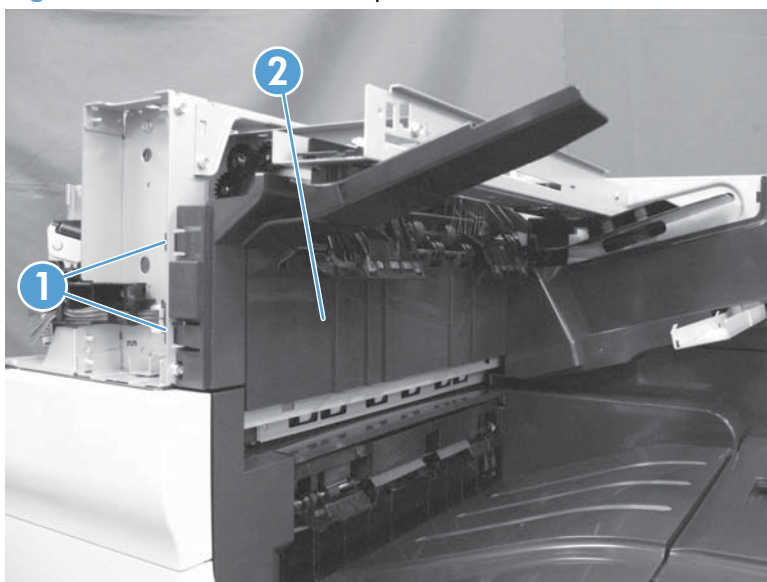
Remove the stapler/stacker rear inner cover (2 of 2)
